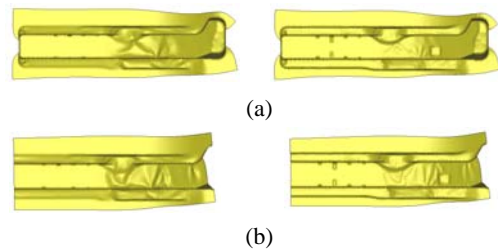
Deformed shape of the blank with draw-bead : (a) CASE2; (b) CASE3.
